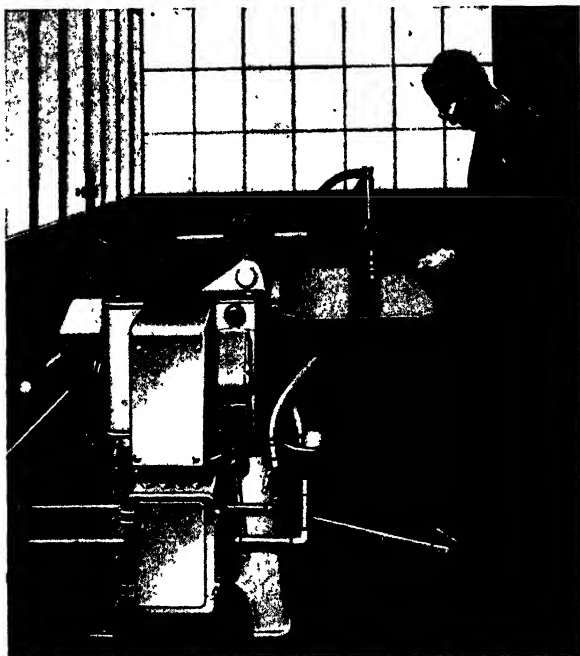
Spot welding machine equipped with thyatron contactor timing equipment
